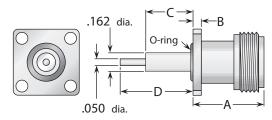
(O-ring seal on flange, 11/16" square flange, interchangeable with BNC and TNC standard flange size)
